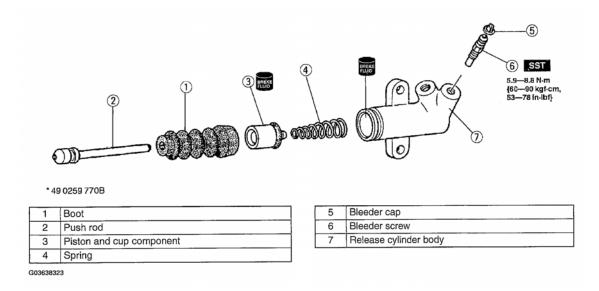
Disassembling Clutch Release Cylinder - With Torque Specifications Courtesy of MAZDA MOTORS CORP.
